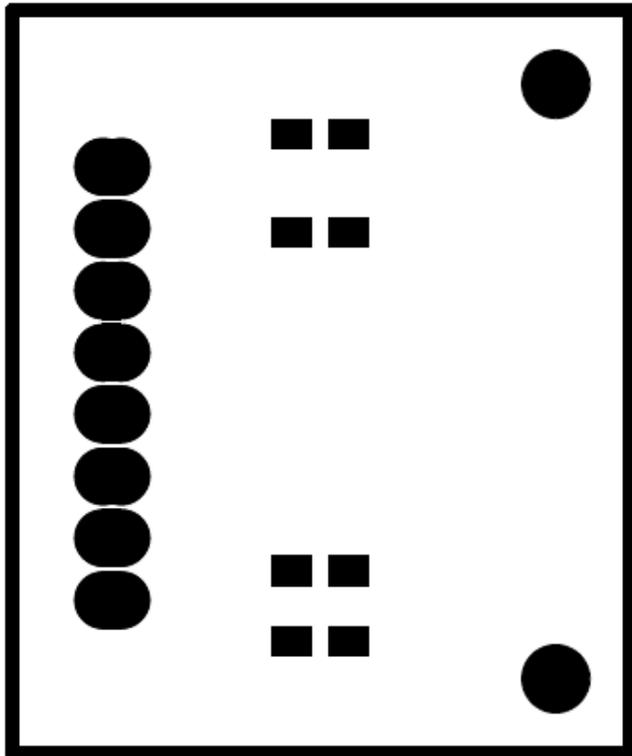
NJL5310R Sensor Board Bottom Solder Mask
